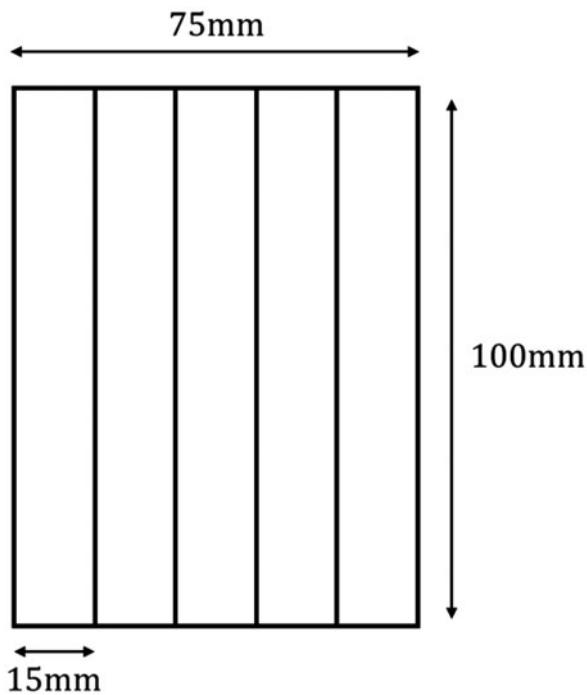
Top view and dimensions of the rudimentary grid used to achieve fiber alignment.
